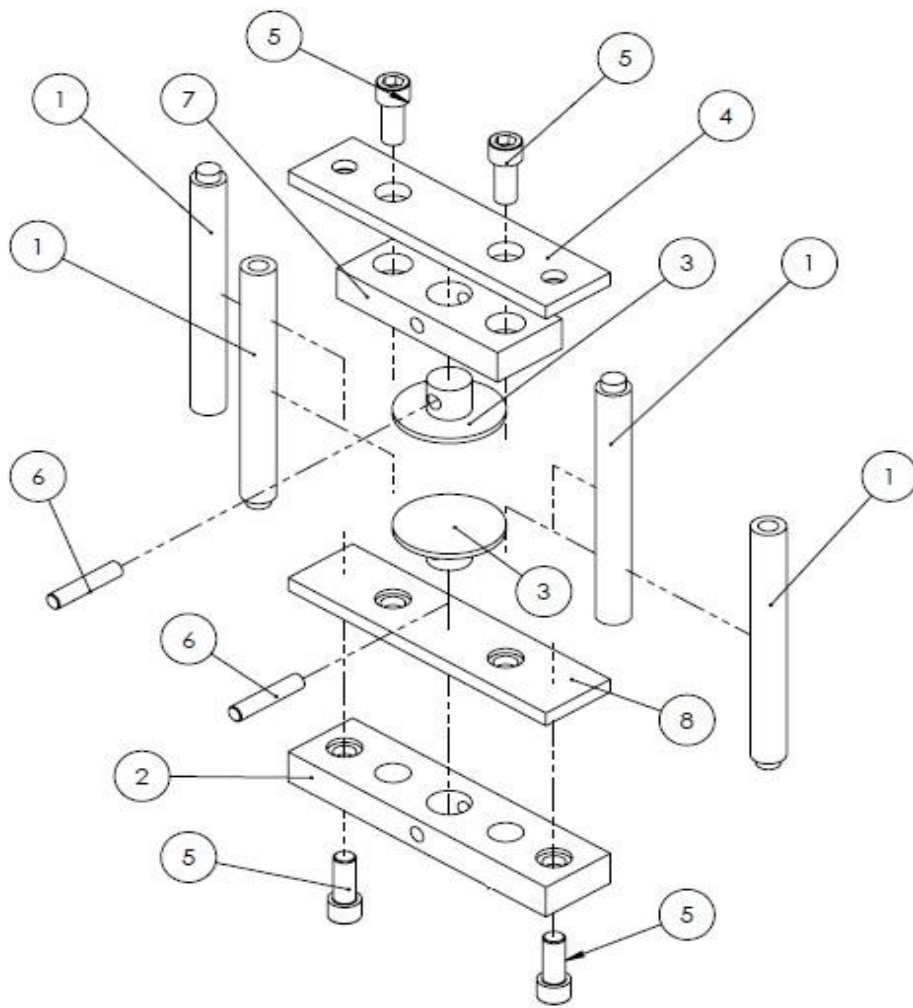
shows all the components of the device. Figure III.11 provides an exploded view of the device, illustrating the various parts of the assembly.
